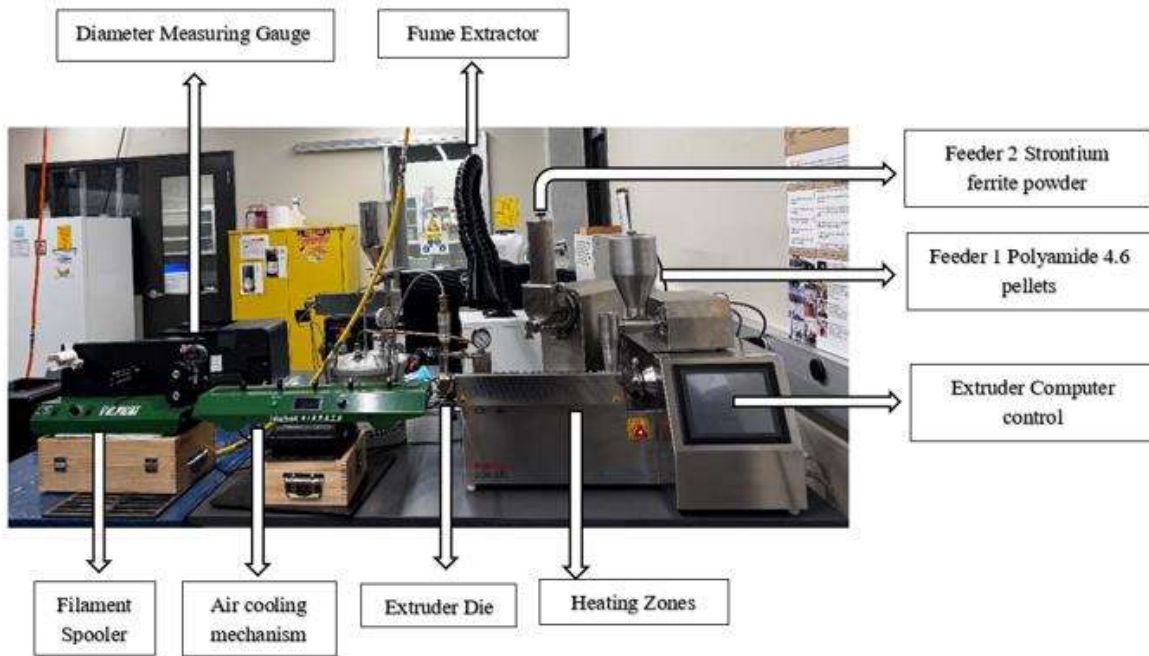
Twin screw extrusion technology using Thermoscientific twin-screw extruder (Process 11).
